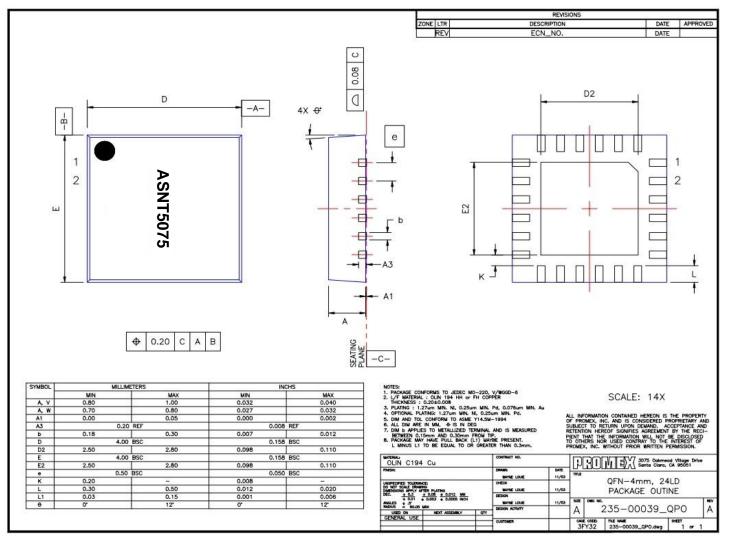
QFN 24-Pin Package Drawing (All Dimensions in mm)
